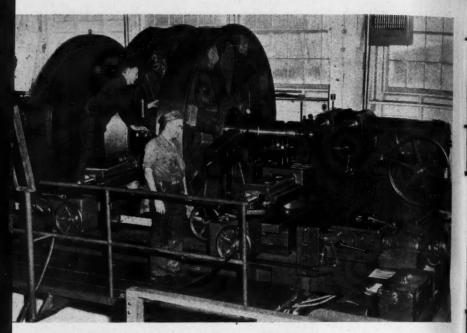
Turning Gears for Reducing Speed from 6,000 R.P.M. at the Turbine to 90 R.P.M. at the Propeller. The Allowance on the Diameter is 0.001 Inch
